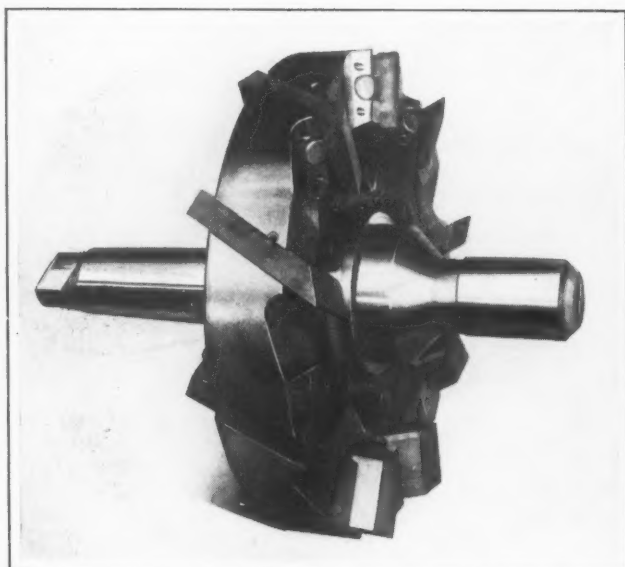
Spot-facing Tool Ten Inches in Diameter, Used in an Operation on Automobile Rear Axle Housings
